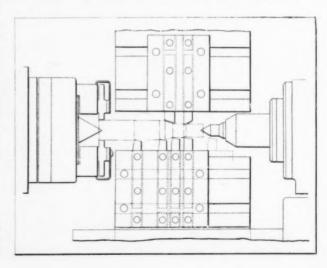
Tool Layout on a Drummond Maximinor Lathe for the First Turning Operation on the Final Drive Spindles
